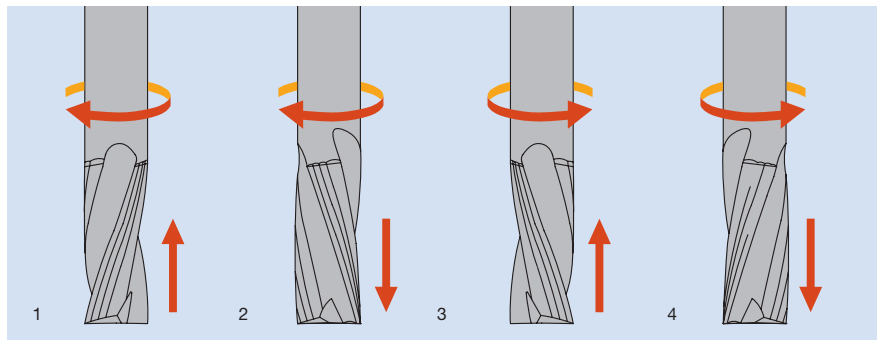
RH-RD positive twist, workpiece face side to bottom, good chip flow into dust extraction.
